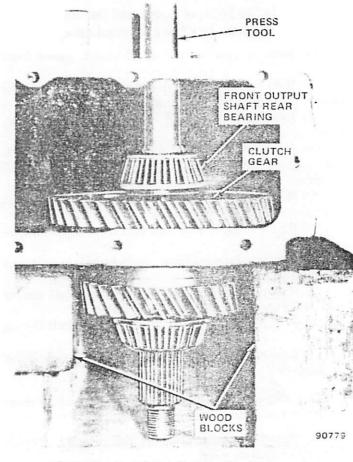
D-81 Front Output Shatt Rear Bearing Removal
